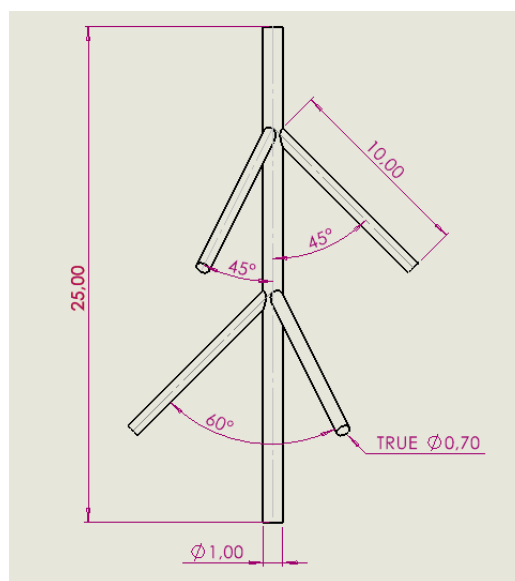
Sketch of the mung bean root structure with indicated construction dimensions. All measurements are provided in millimeters (mm).
